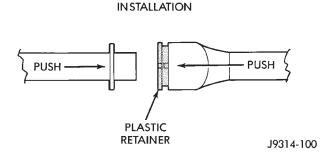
Plastic Retainer Ring-Type Fitting HIGH-PRESSURE FUEL LINES
